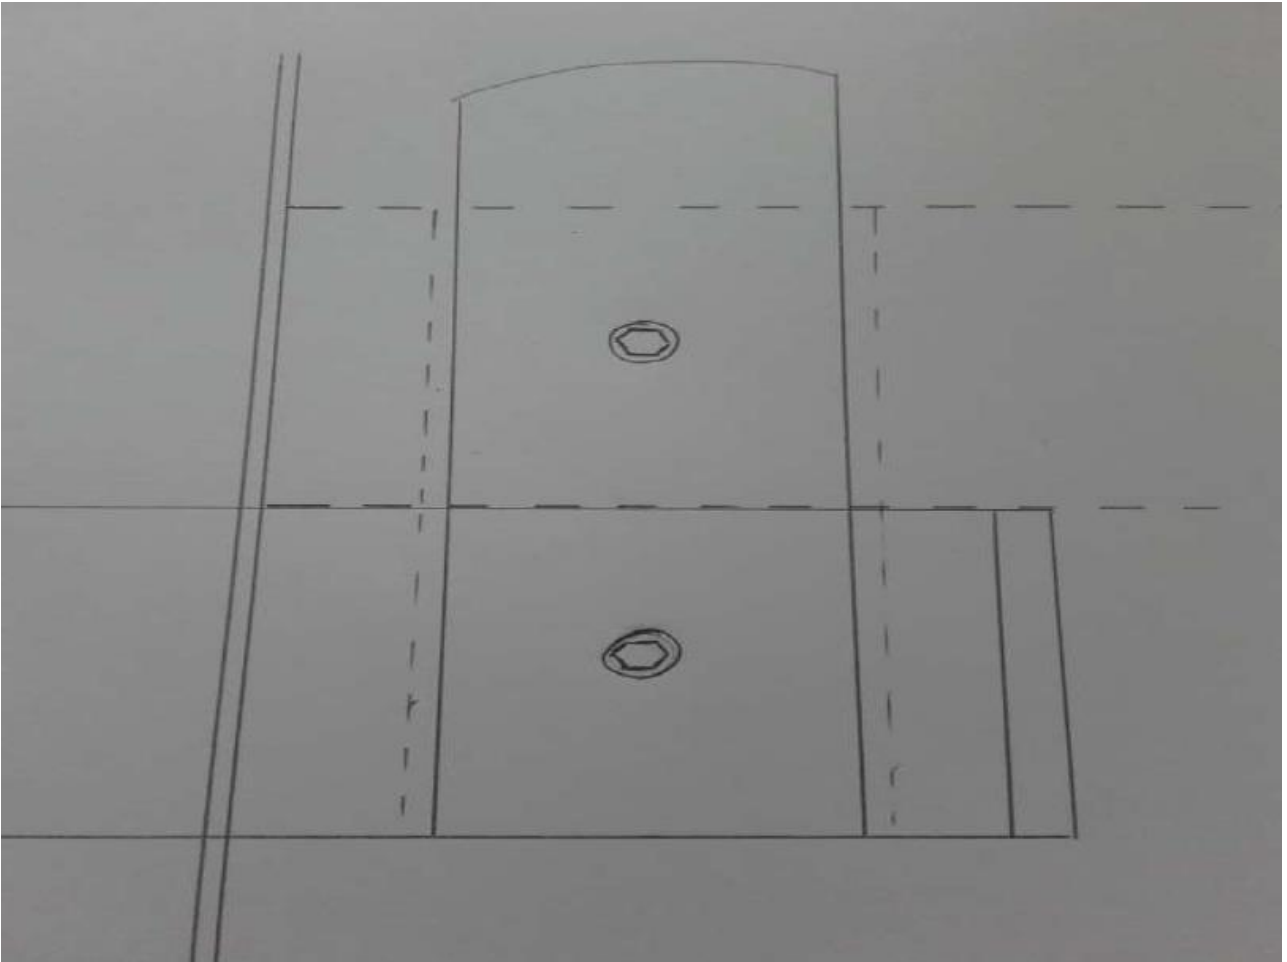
Rudder hinge with socket screws after drilling and thread cutting.
